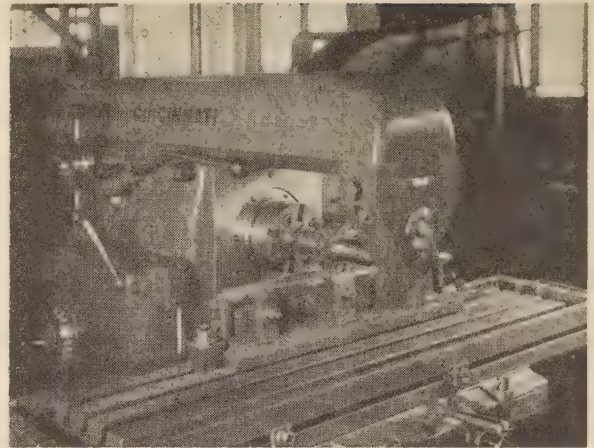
SETUP USED IN DOWN MILLING FROM SOLID T-SECTION ON MILLING MACHINE EQUIPPED WITH BACKLASH ELIMINATOR
